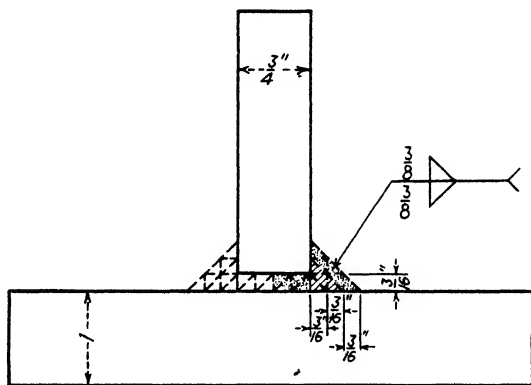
The result of a bad fit that leaves a gap equal to one-half the size of the specified weld is that it requires, by ordinary welding practice, over three times the weld metal that is required for a properly fitting joint.
